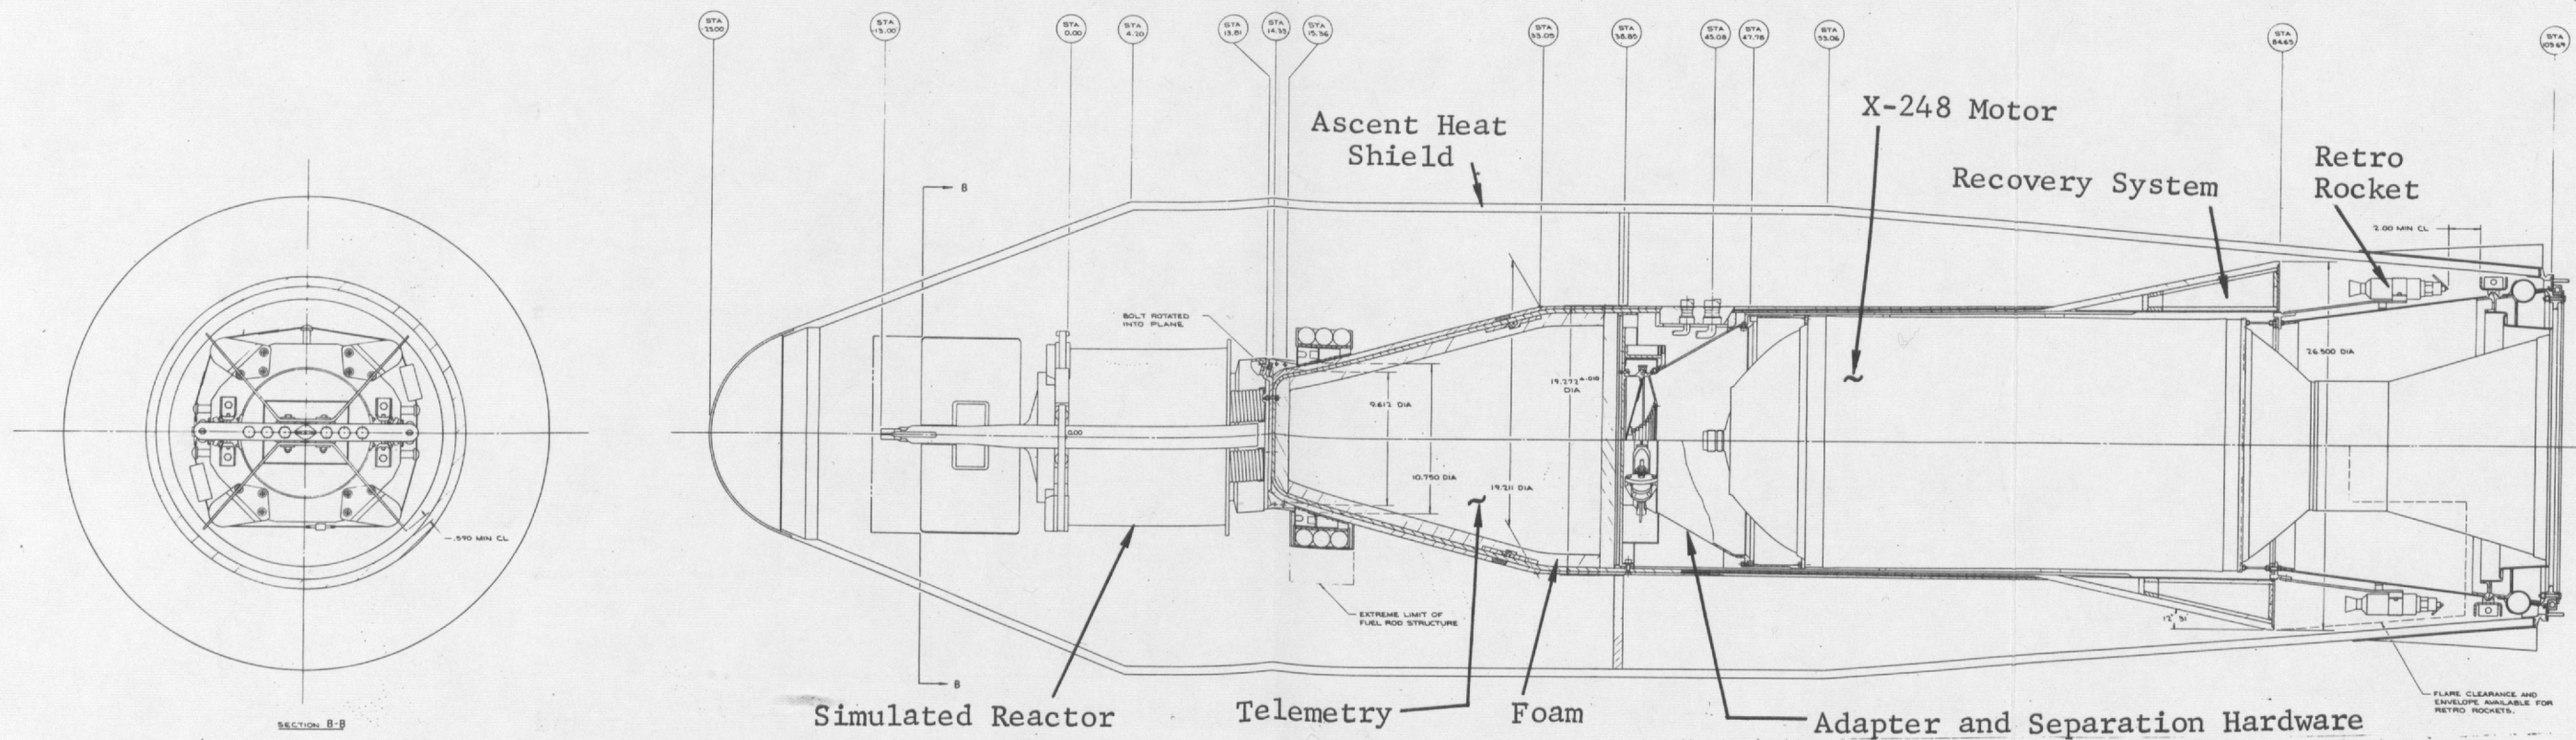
Layout drawing of RFD-1 with fourth stage motor
